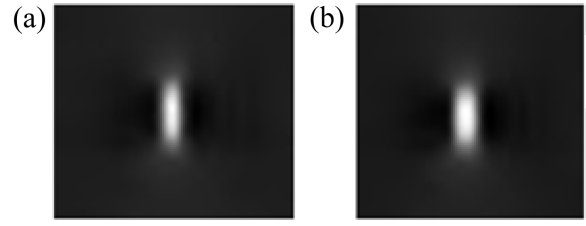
MFL images of SGT with surface defects (a) length 2 mm, depth 1.15 mm, width 13.5 mm (b) length 3 mm, depth 1.38 mm, width 13.5 mm.
